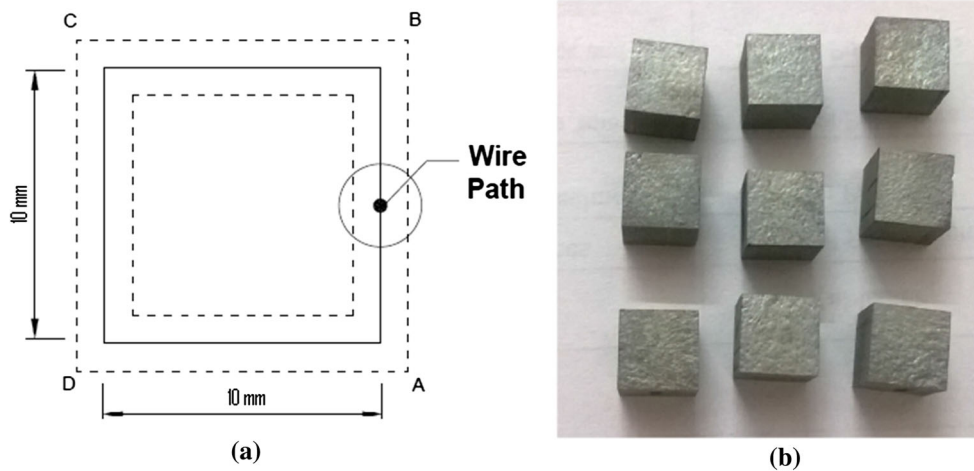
a Rectangular profile cut on work piece. b Machined Al/WC samples
